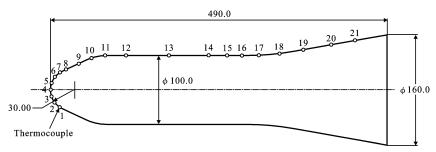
HB-2-type standard model; dimensions in millimeters.
